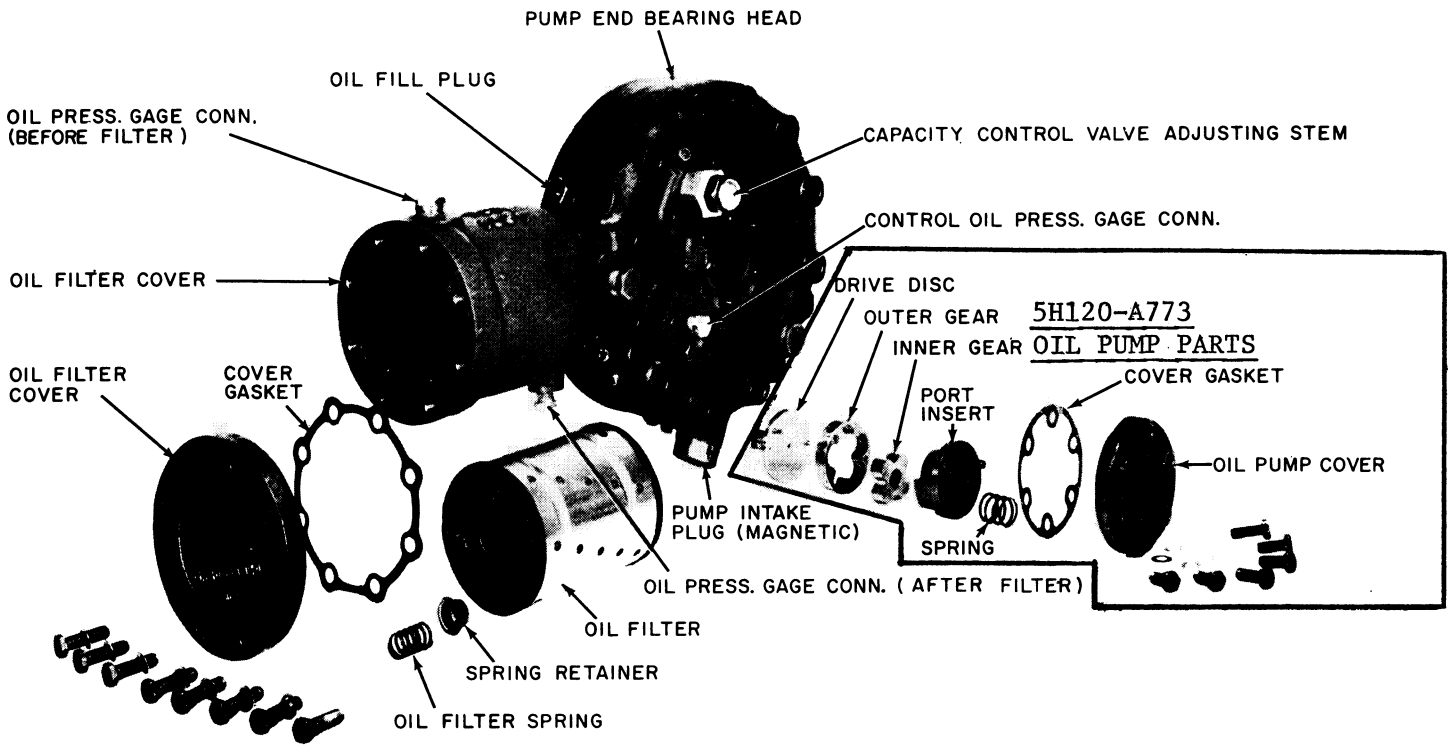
Oil Pump & Filter Assembly (5H120/126, used 1969 - 1986)
